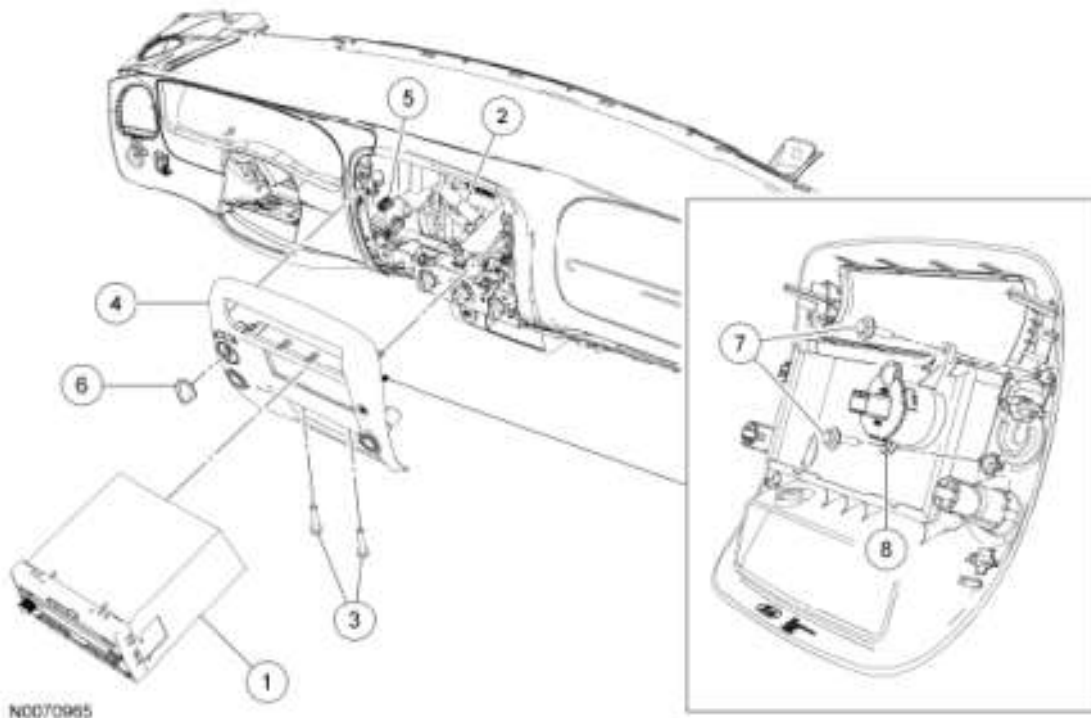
Mode Select Switch, Audio Unit And Antenna Cable Exploded View
